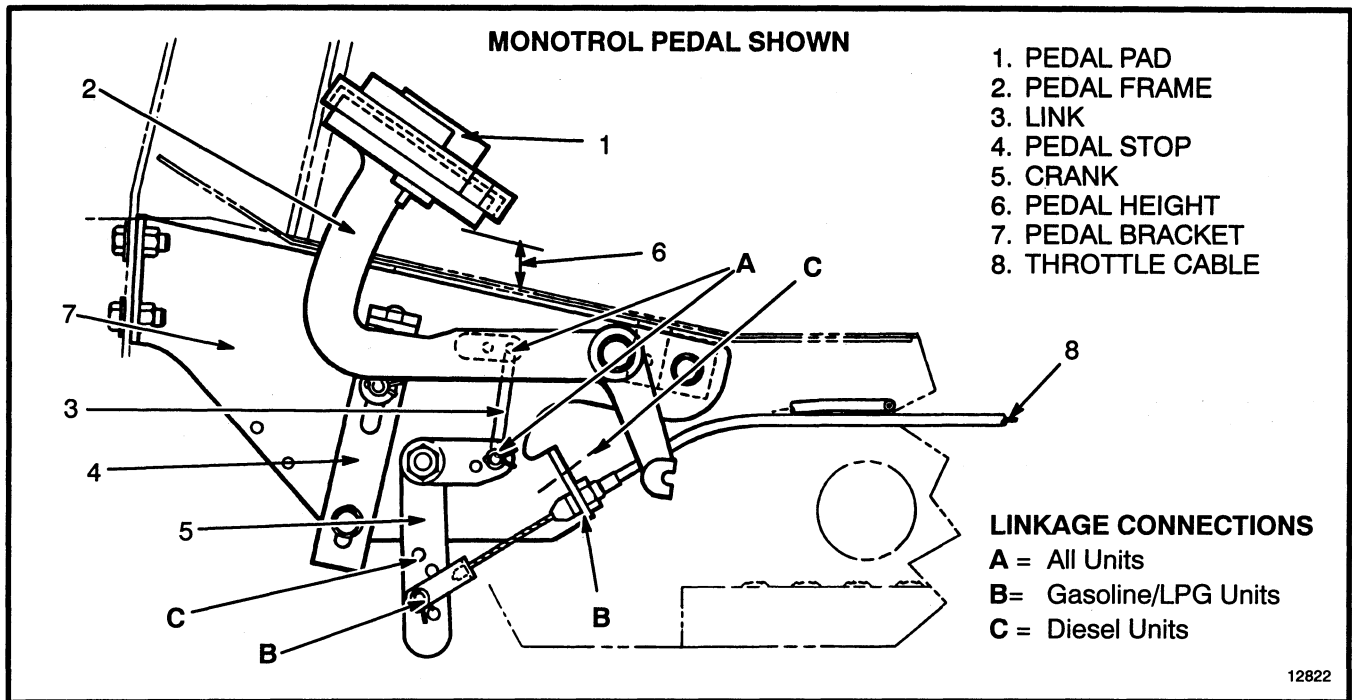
THROTTLE ARRANGEMENT, S/H1.50-1.75XM, S/H2.00XMS (S/H25-35XM, H40XMS)
